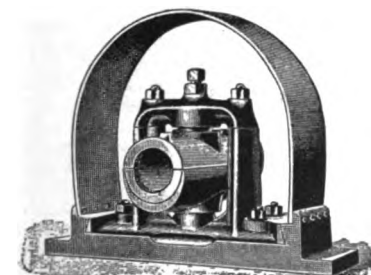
WALL FRAME FOR PILLOW BLOCK.
